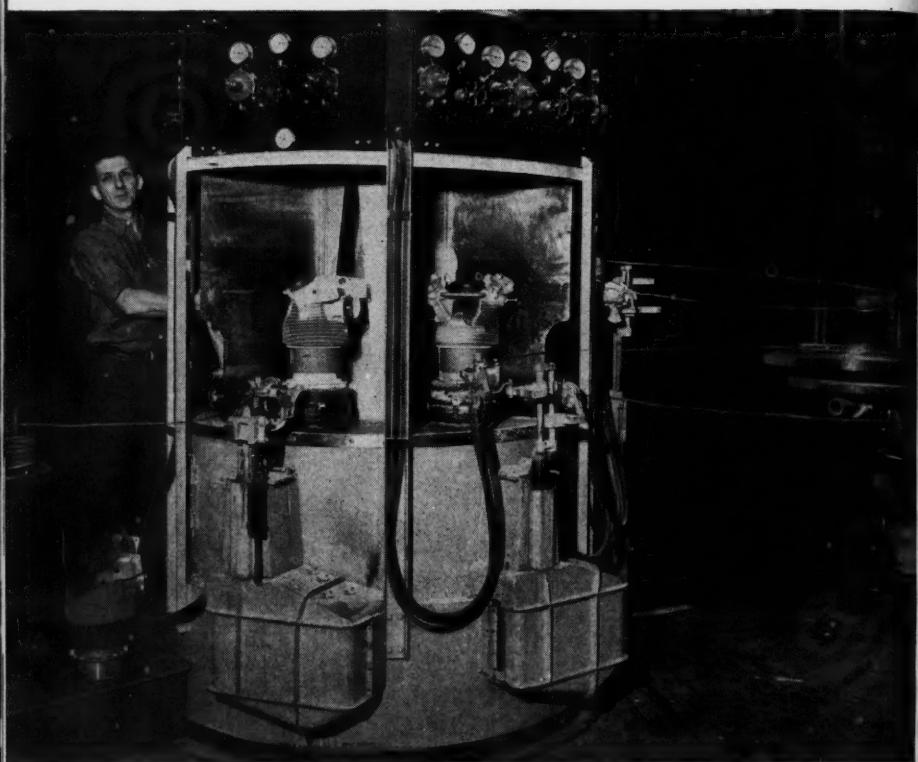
The Finished Cylinder Head is Sprayed with a Coating of Molten Aluminum which Seals It against the Action of the Elements
